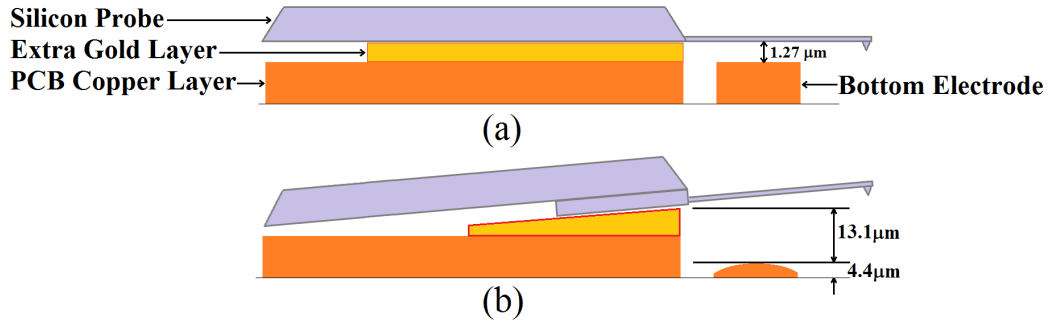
Declaration of the problem in probe carrier board PCB: (a) primary design assumption, (b) the first version
